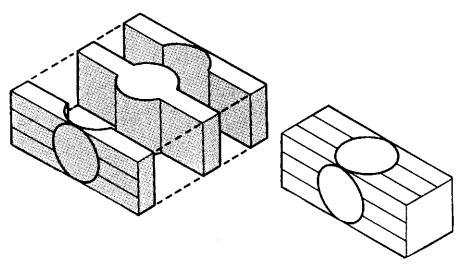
When doing the layout for compound cutting, the pattern must be marked on adjacent sides of the workpiece.
